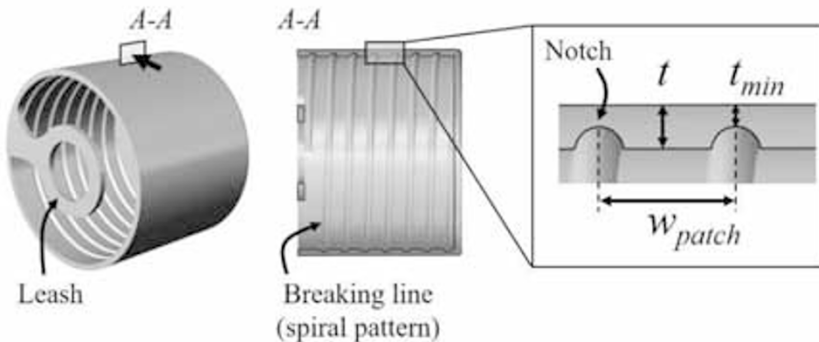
Test specimen of break-out core with spiral-shaped breaking line defined by patch width w_{patch} , wall thickness t of core shell, and reduced wall thickness t_{min} along the breaking line.
